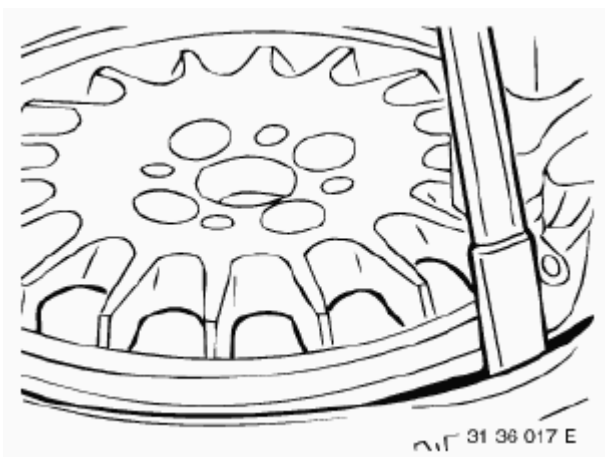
Raising Tyre Bead With Tyre Iron Mounting Finger
